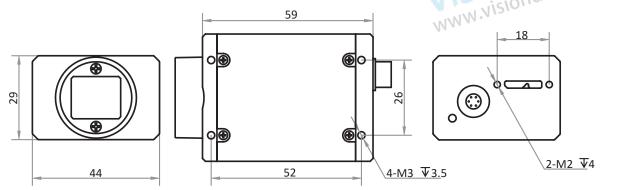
29 mm×44 mm×59 mm Mechanical Dimensions (in mm) of the USB3.0 camera.
